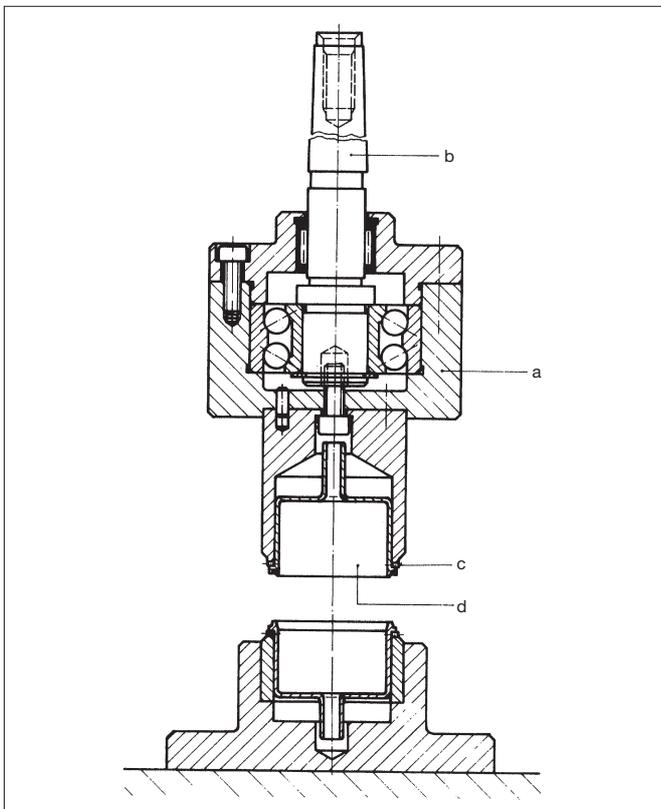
Inertia Welding using ordinary bench drills
